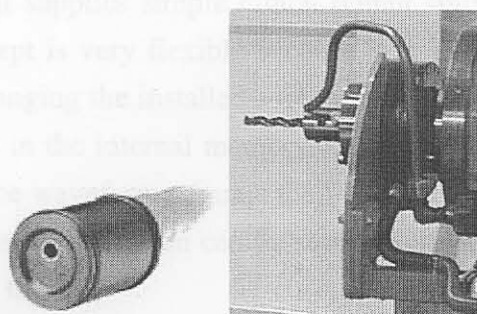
Kistler AE 8152A1 sensor mounted
